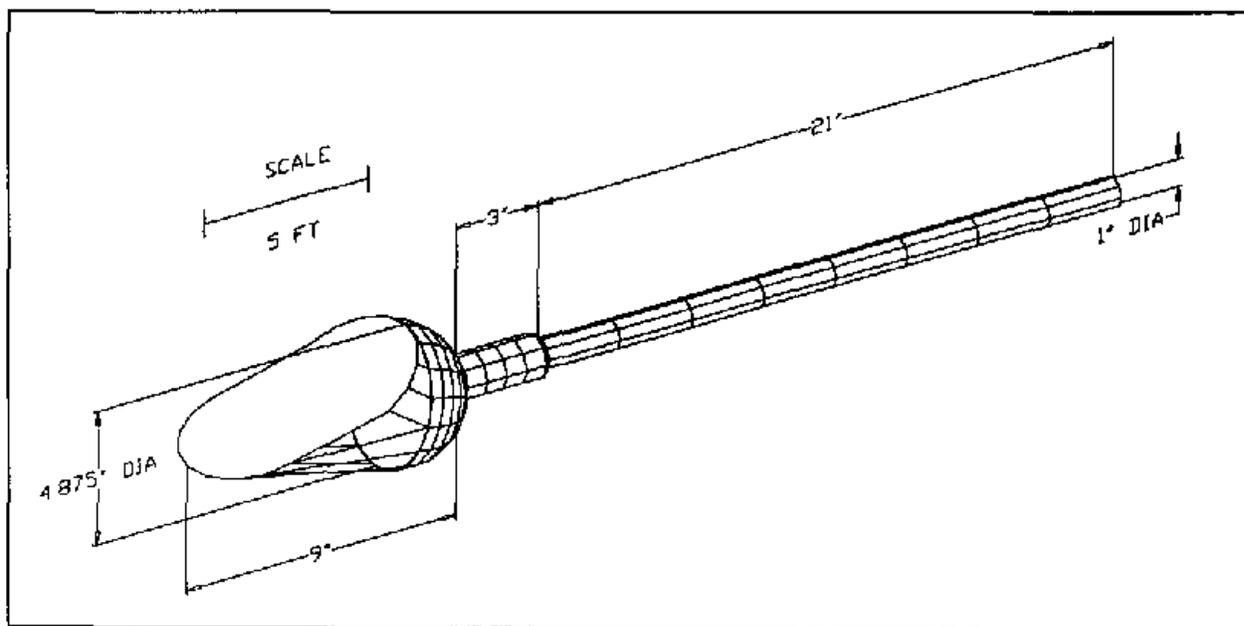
Schematic of long-handle scoop used to remove material from the bottom of a drum
